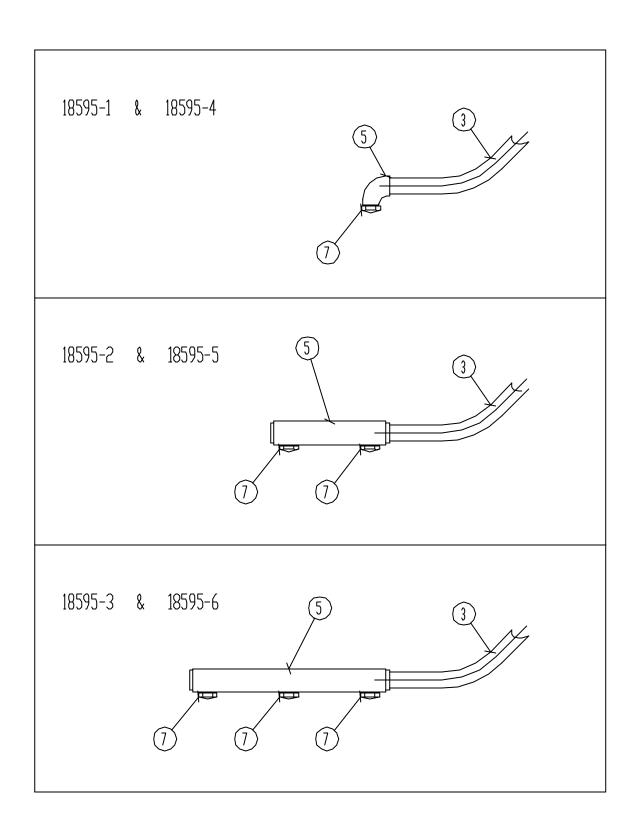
HANDSPRAY WAND ASSEMBLY (SHEET 2 OF 2)
